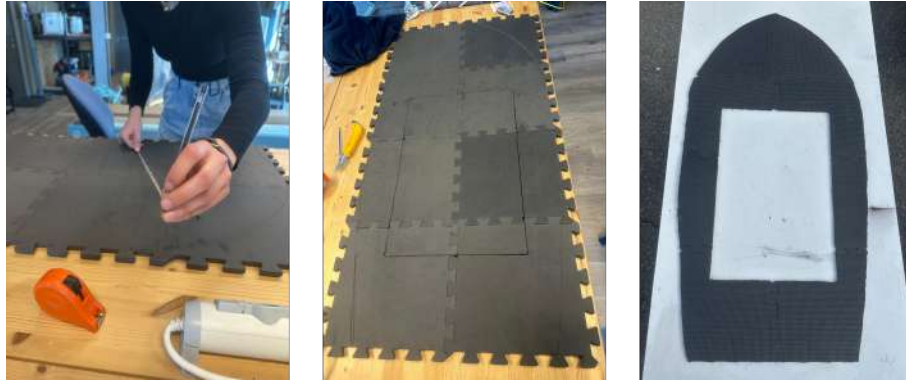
Process of cutting the grip for the board, since de inicial handmade drawings unil the final cut.
